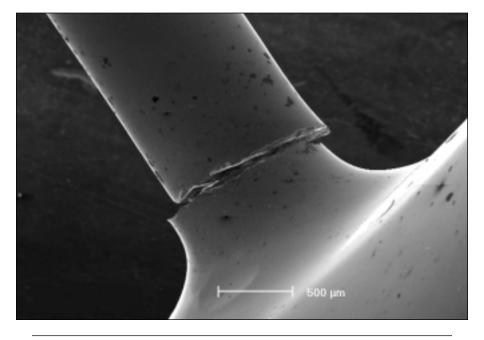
Single leg strut bending fatigue fracture in an explanted Björk-Shiley 60° convex-concave prosthetic heart valve. The pyrolytic carbon disk typically embolizes after the second strut leg fractures. Note that fracture did not occur in the area of maximum bending stress, suggesting that weld quality in addition to abnormal loading caused the strut to fracture.
